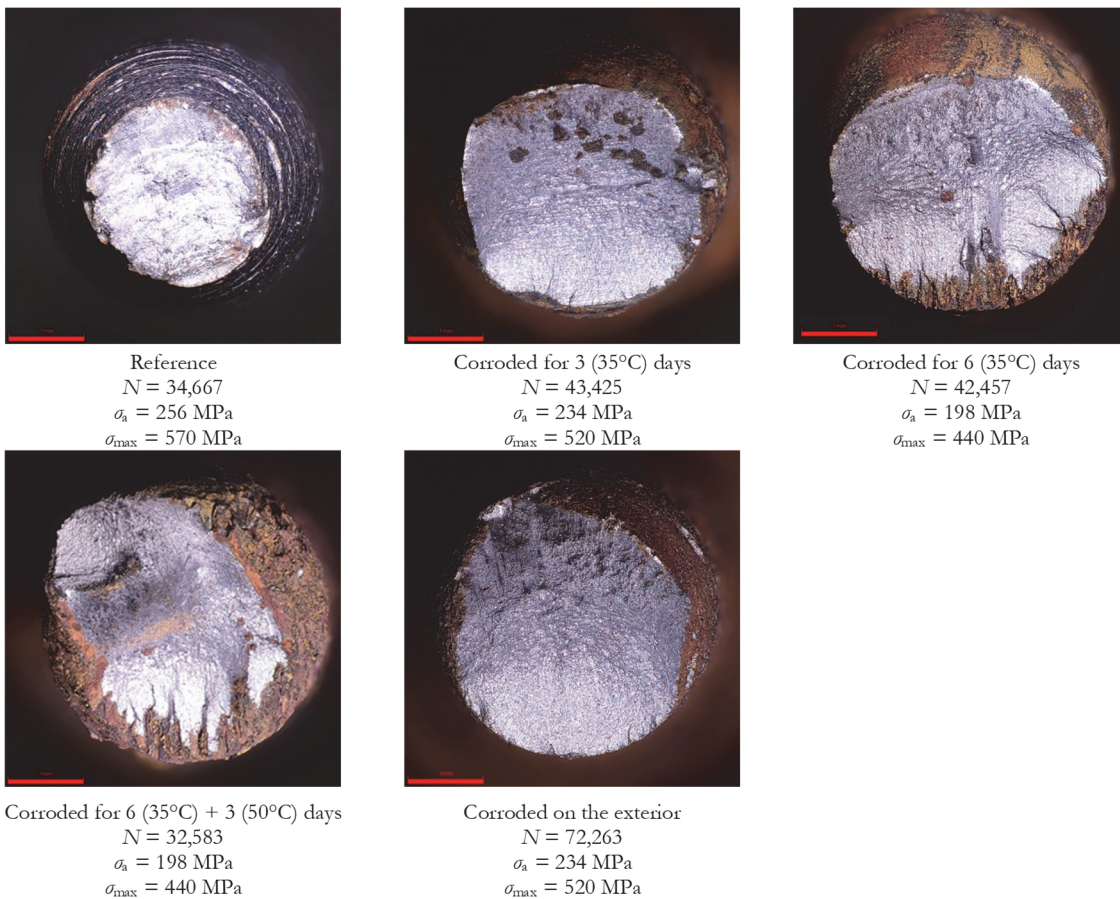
A set of photographs of fracture surfaces of steel specimens for the region of approximately 40,000 cycles.
